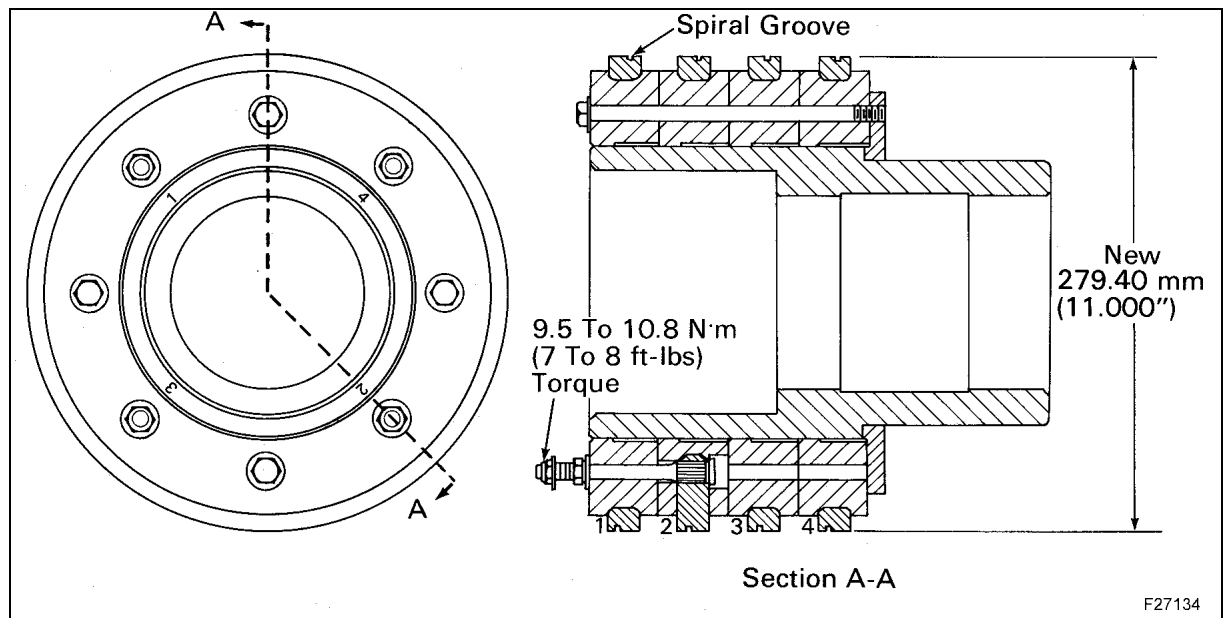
AC Generator Collector Ring Assembly, Cross-Section (AR11 Type Alternator Shown)
